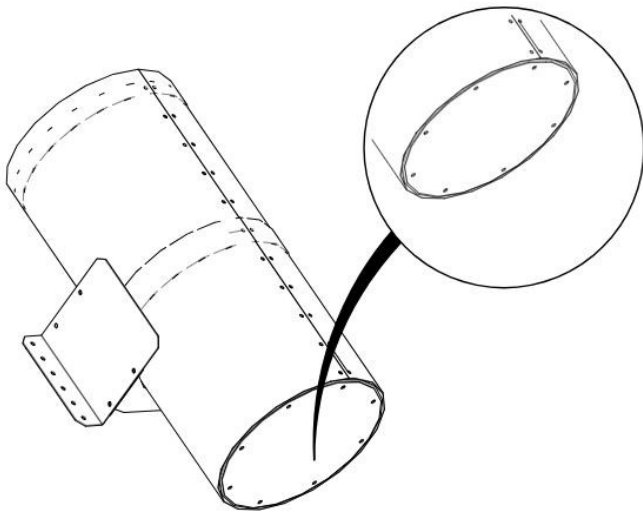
Bottom Conical Air Inlet Sheet
